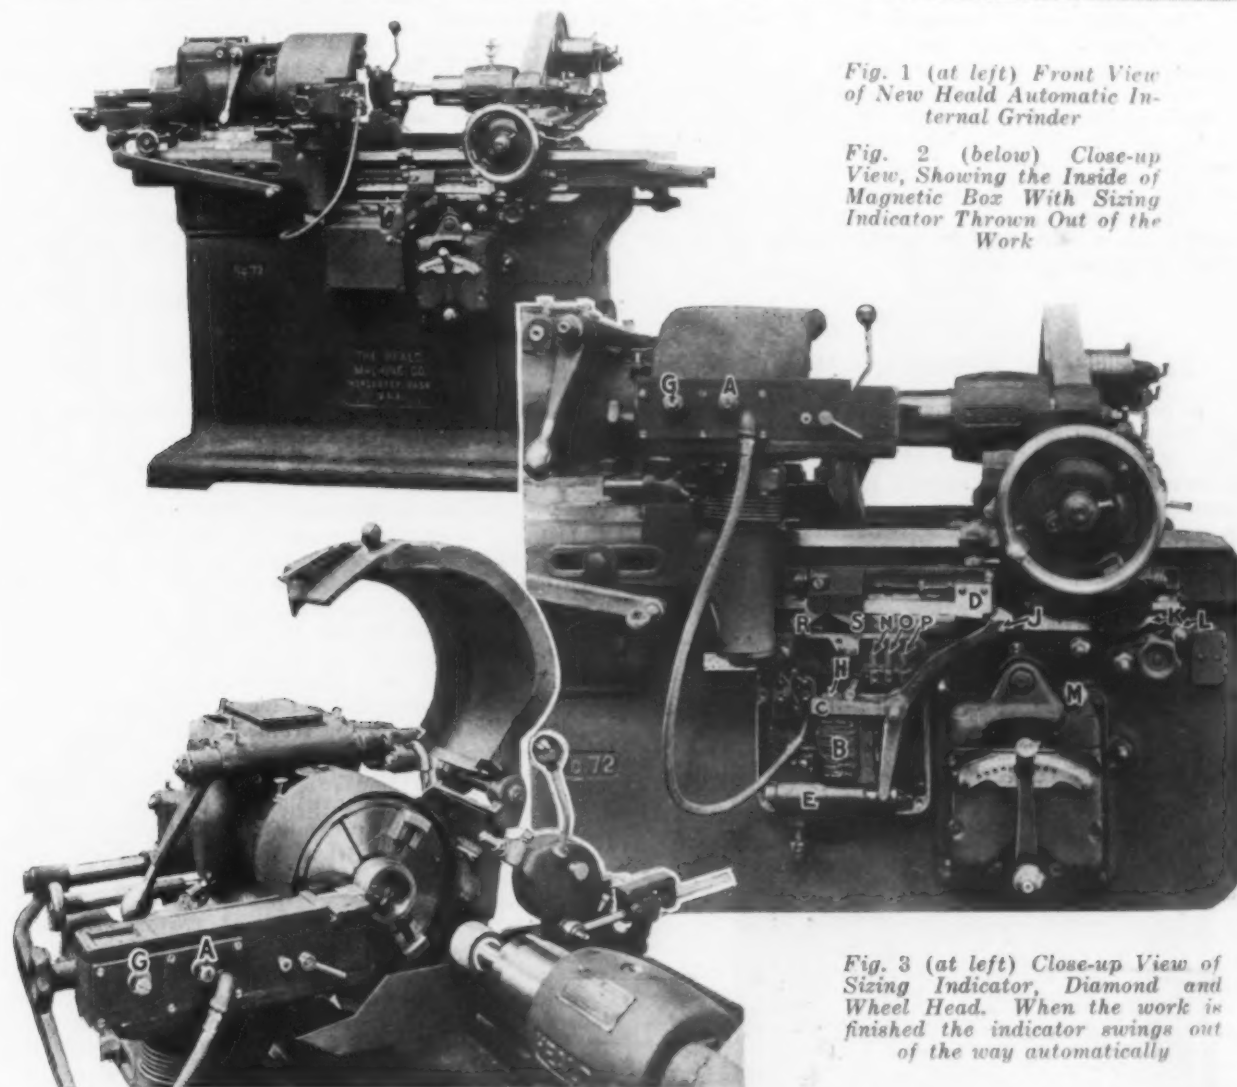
(at left) Front View of New Heald Automatic Internal Grinder
